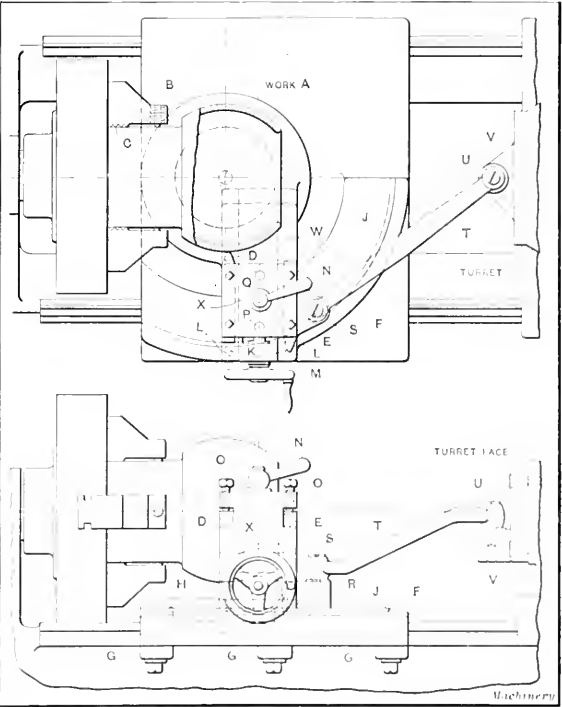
Spherical Turning Device for Horizontal Turret Lathe
